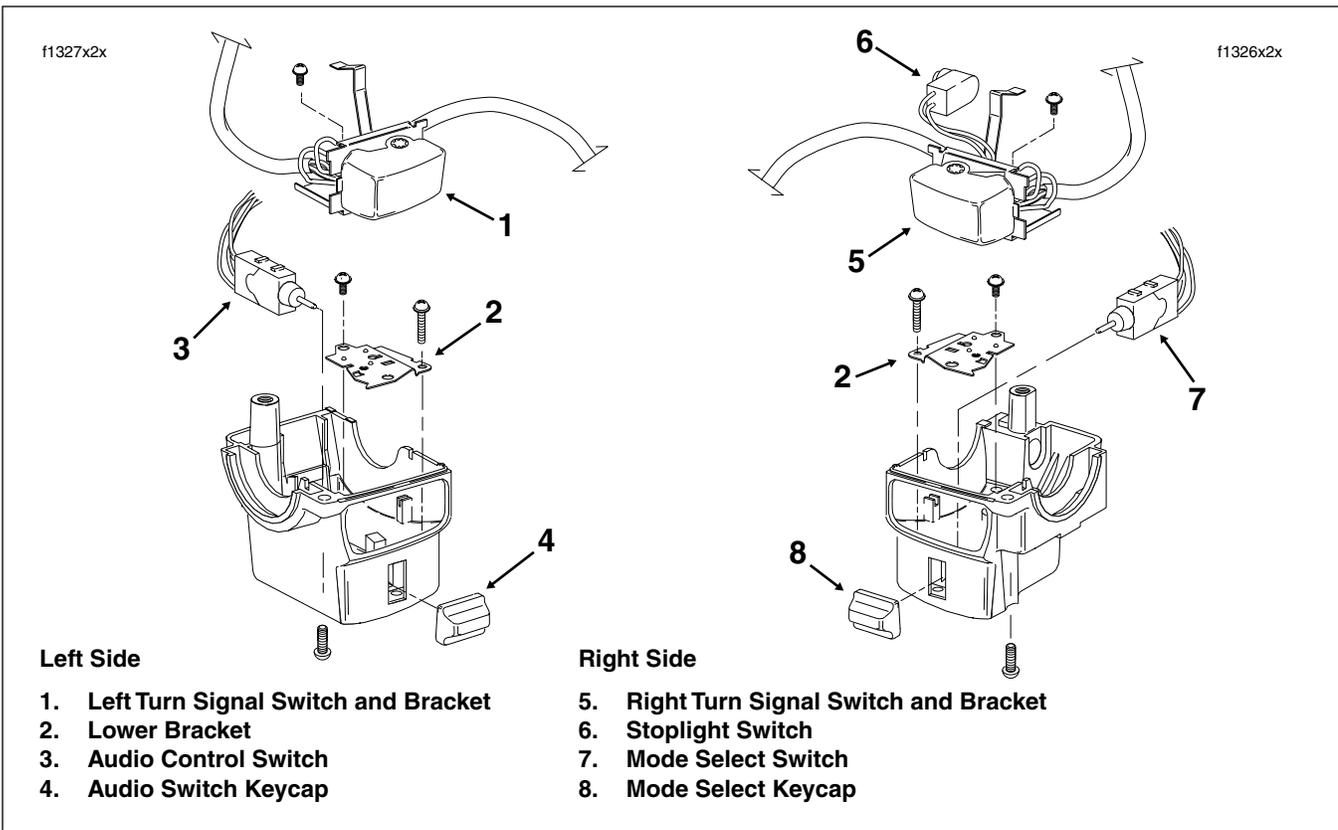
Lower Handlebar Switch Assemblies (Classic)
